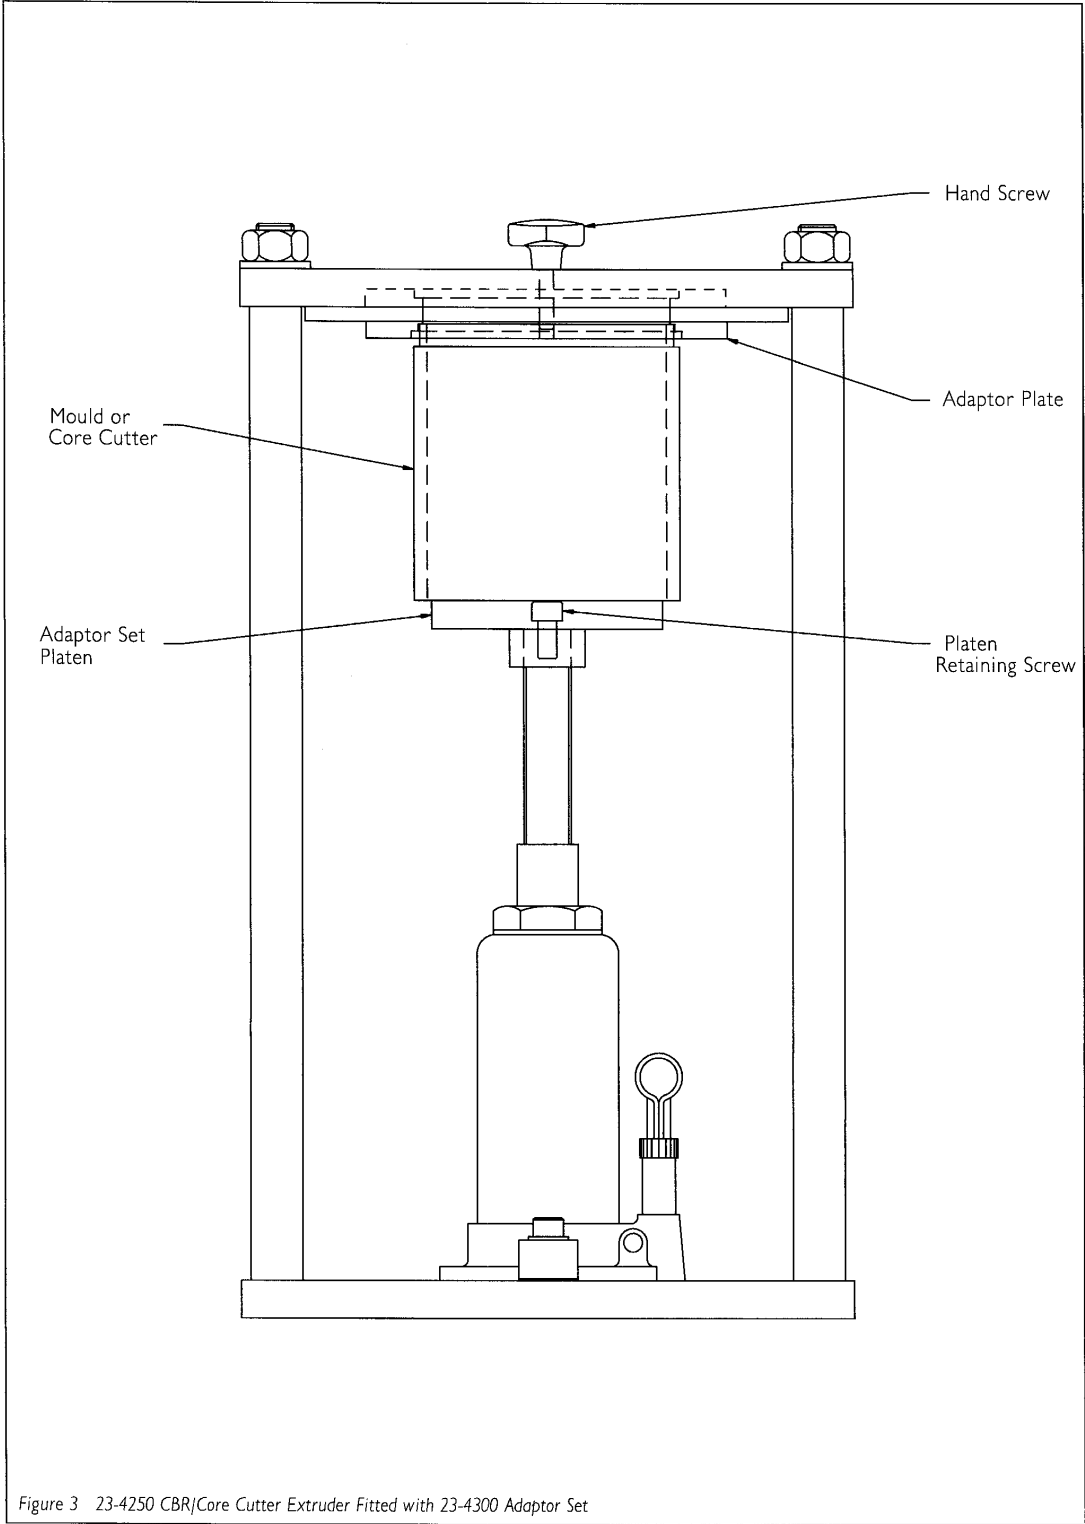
23-4250 CBR/Core Cutter Extruder Fitted with 23-4300 Adaptor Set
